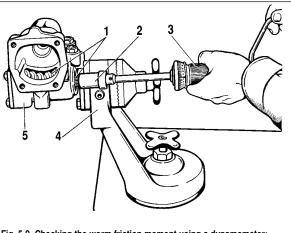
Checking the worm friction moment using a dynamometer: 1 - worm; 2 - head A.95697/5; 3 - dynamometer 02.7812.9501; 4 - test-bench bracket; 5 - steering box
